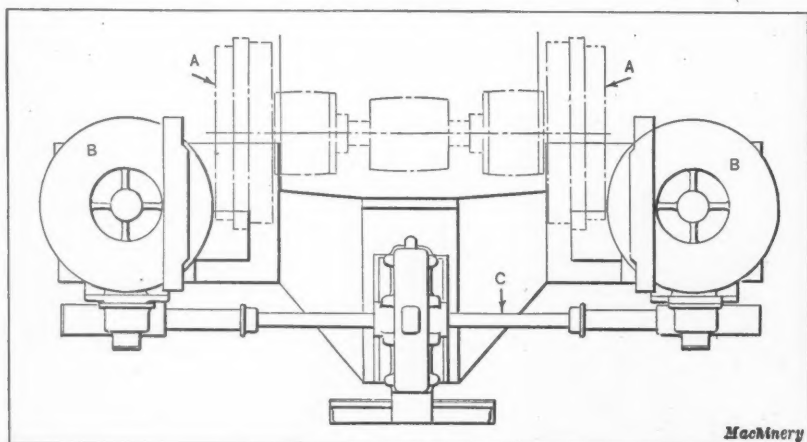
Diagram of an Arrangement applied to a Single-spindle Machine for obtaining High and Accurate Production in grinding the Edges of the Sole Plate
